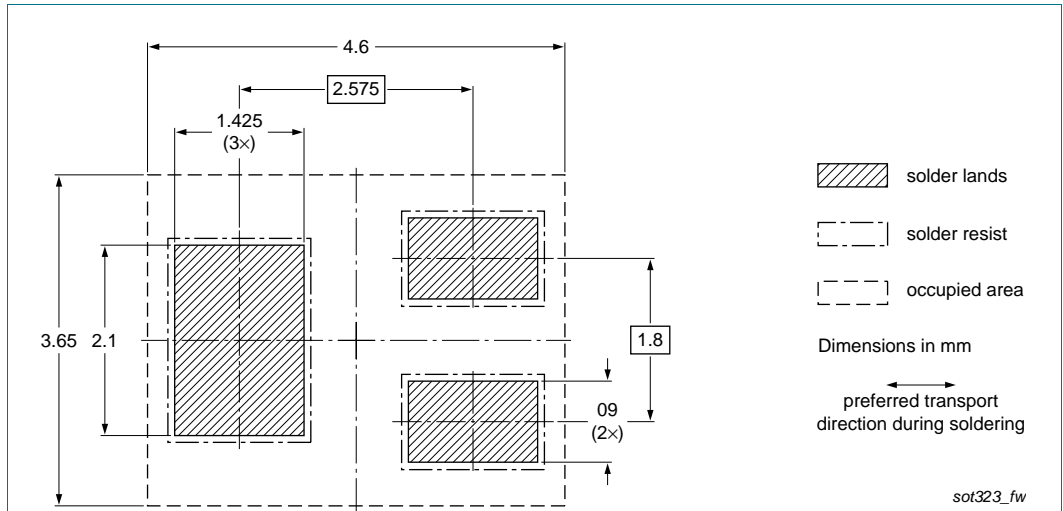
Wave soldering footprint BAS16W (SOT323/SC-70)
